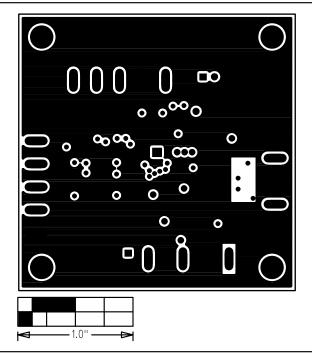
MAX8739 EV Kit PC Board Layout—GND Layer 2
